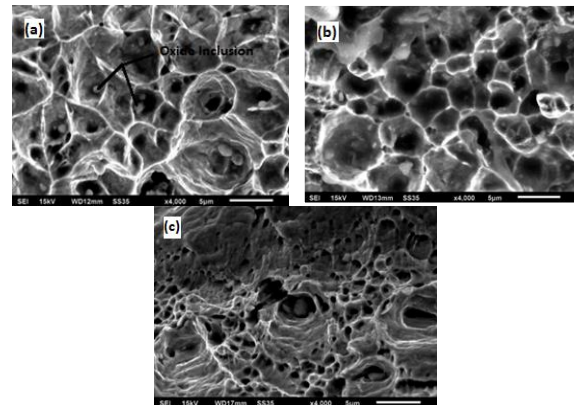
SEM images of fractured tensile samples (a) Welded with flux (b) Without flux (c) Unwelded base metal
